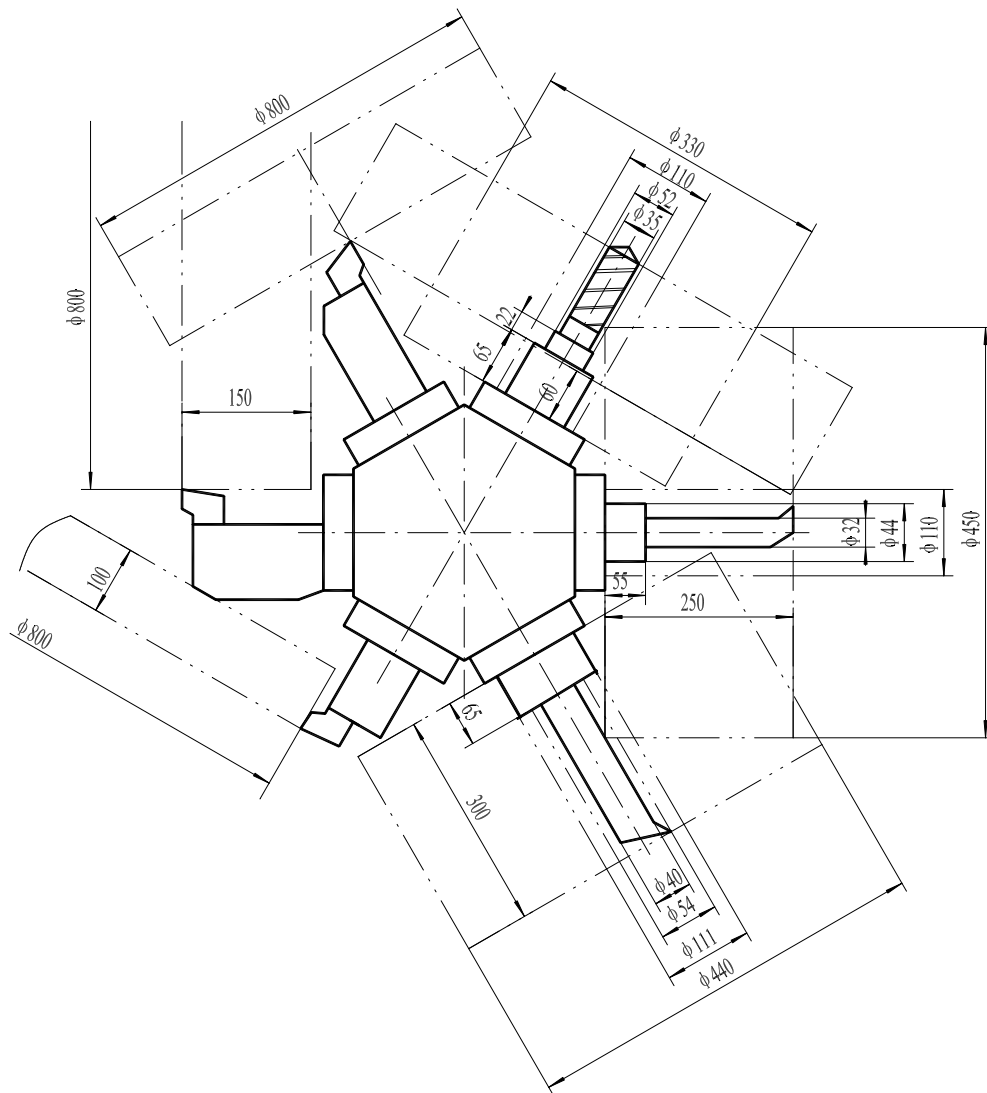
Turning limited-area drawing of standard tools for vertical 6-station turret
